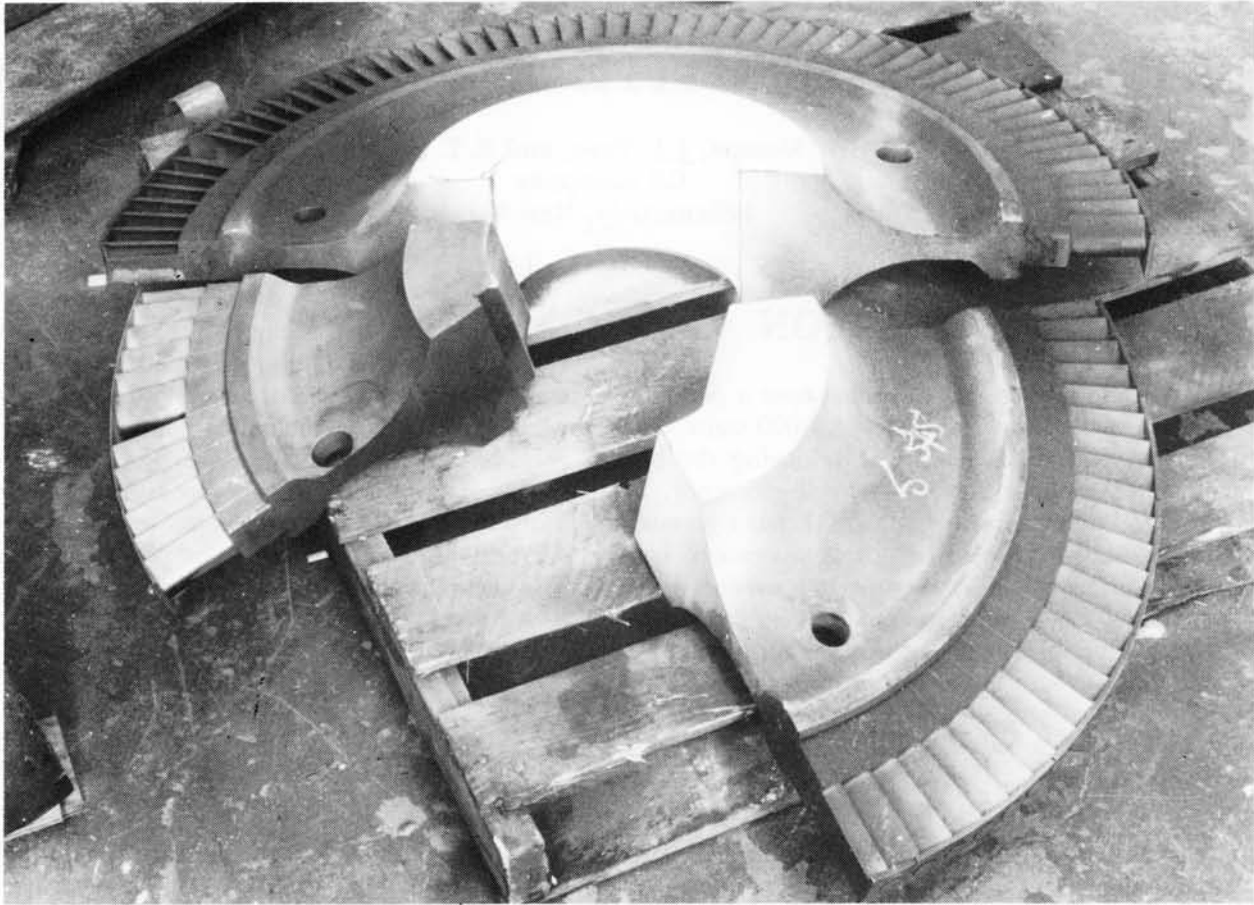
Shrunk-on turbine wheel failure resulting from caustic stress-corrosion cracking.
